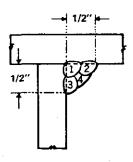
Multi-Layer Deposit - Overhead Tee Joint
